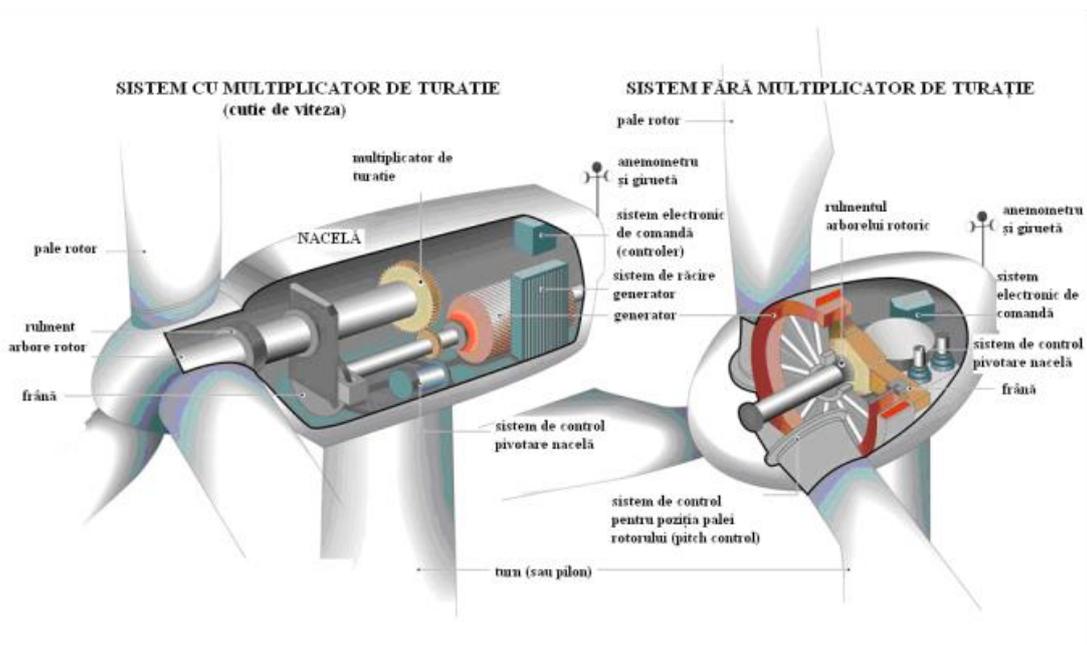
Wind turbine drive system with or without gearbox (speed multiplier) [15]
